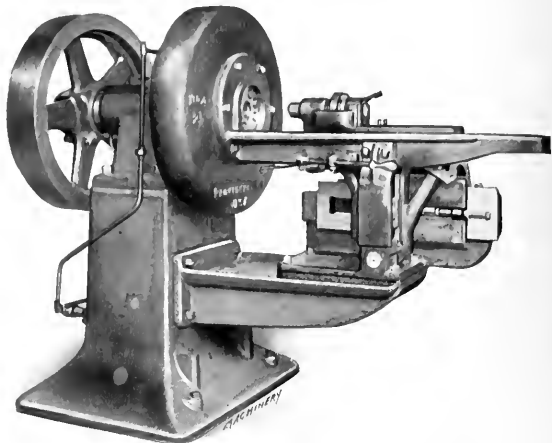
Opposite Side of Langelier Swaging Machine illustrated in Fig. 1
